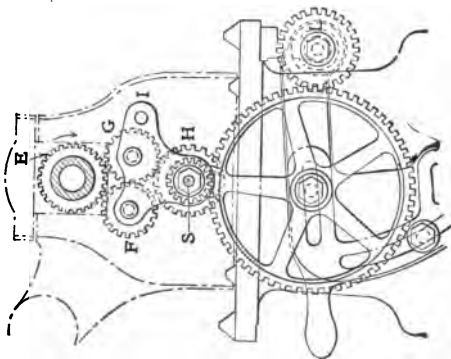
Simple Gearing for Regular Screw Cutting.
